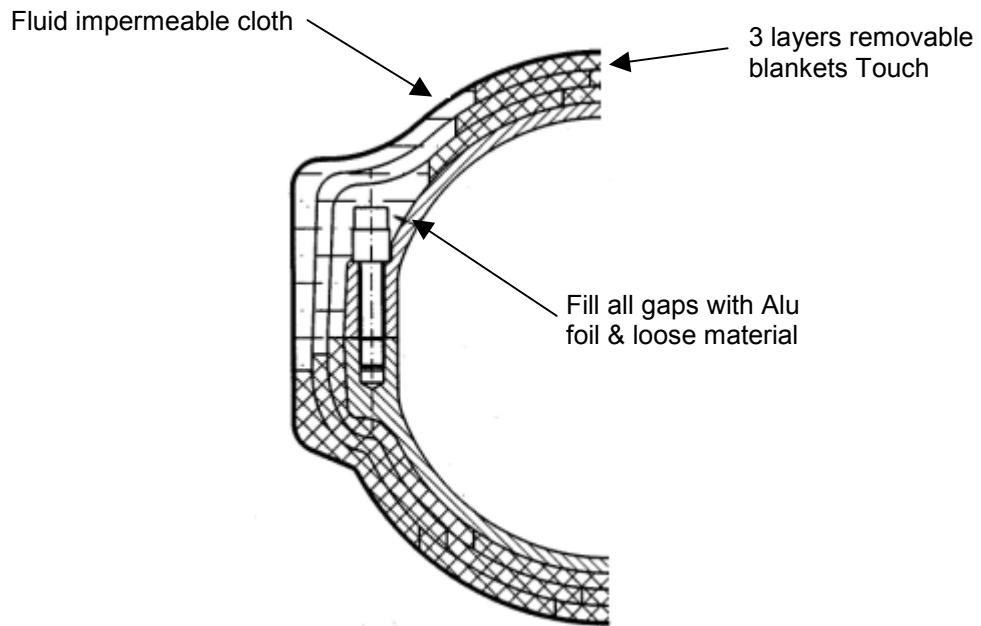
Example of three- layer blanket insulation with displacement of blanket edges in successive layers
